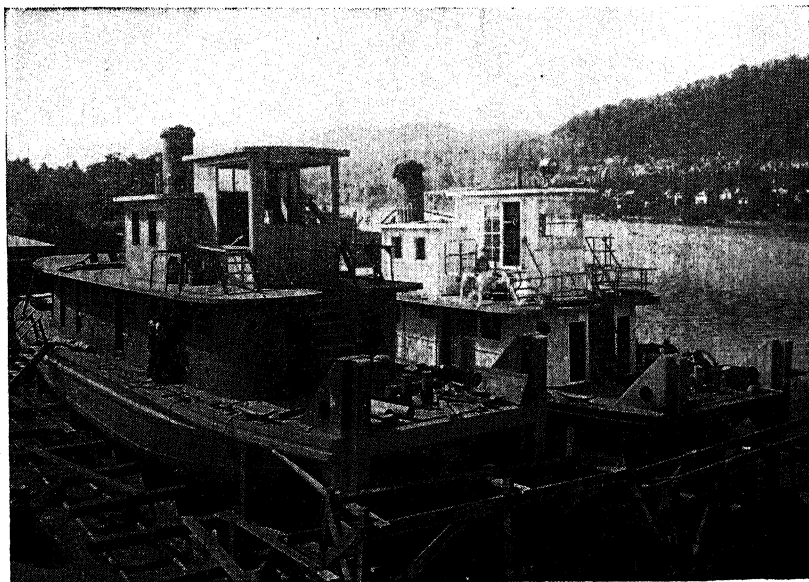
Two single screw Diesel tow boats during course of construction. Length overall 94 ft.; beam moulded 21 ft.; depth 14 ft. 6 in.; draft 4 ft. 10 in. All welded steel construction.
